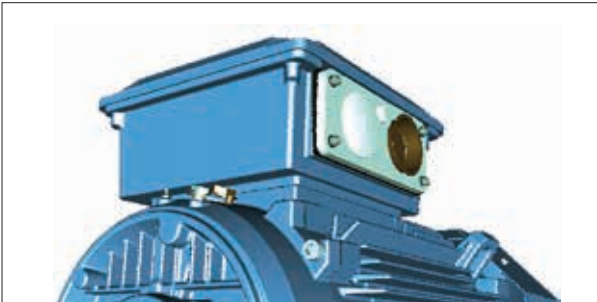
Terminal box for motor sizes 160 – 200. Tapped cable entries integrated in the terminal box.
